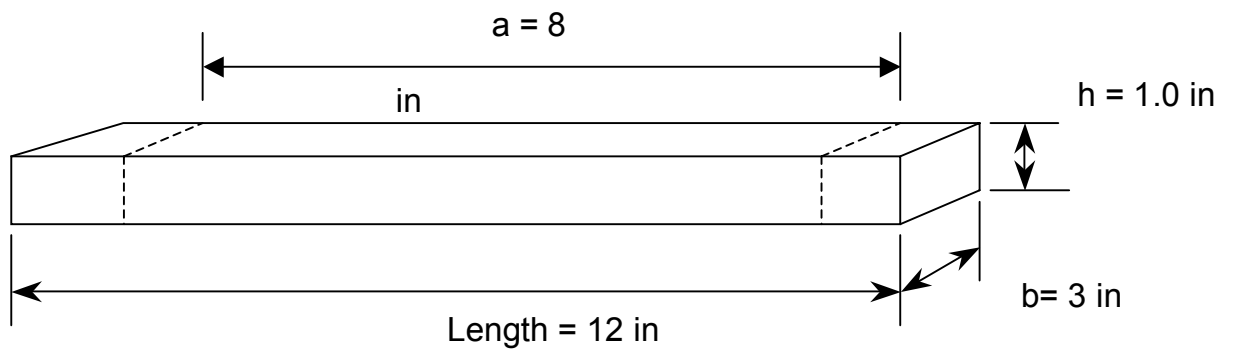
Dimensions of balsa wood- glass fiber polyester specimen tested
